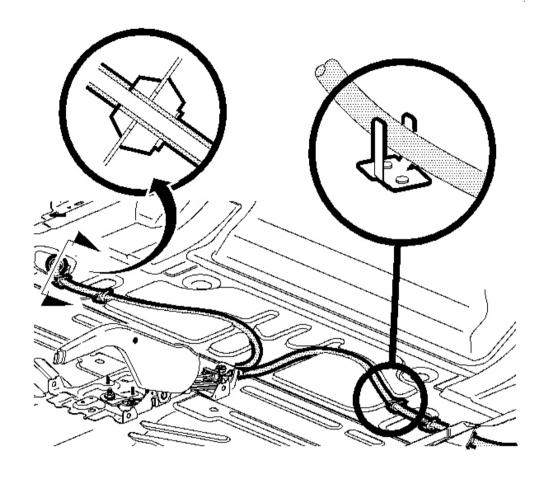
Releasing Rear Park Brake Cable From Cable Equalizer Courtesy of GENERAL MOTORS CORP.
